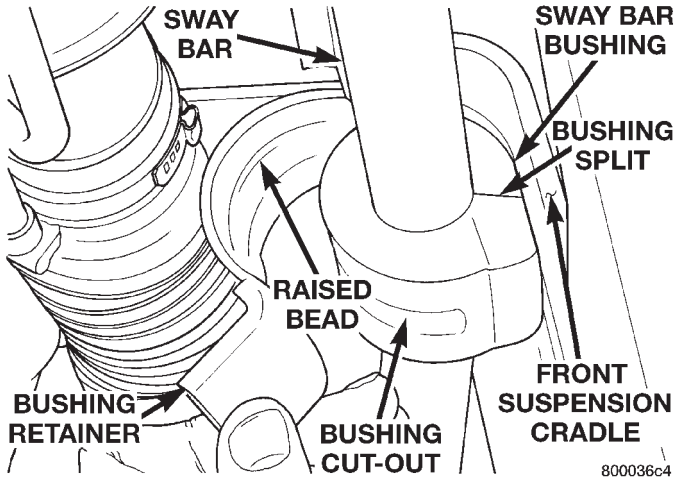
Stabilizer Bar Bushing Retainer Installation
